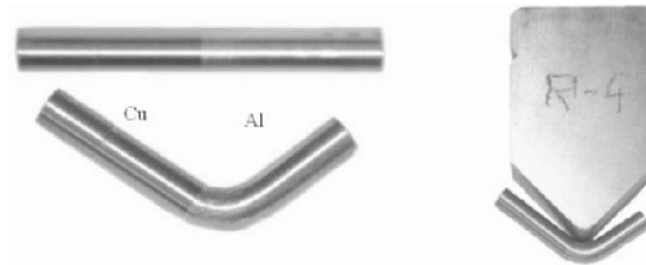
A view of a cold pressure welded Al-Cu sample before and after 90° bending test [4]
